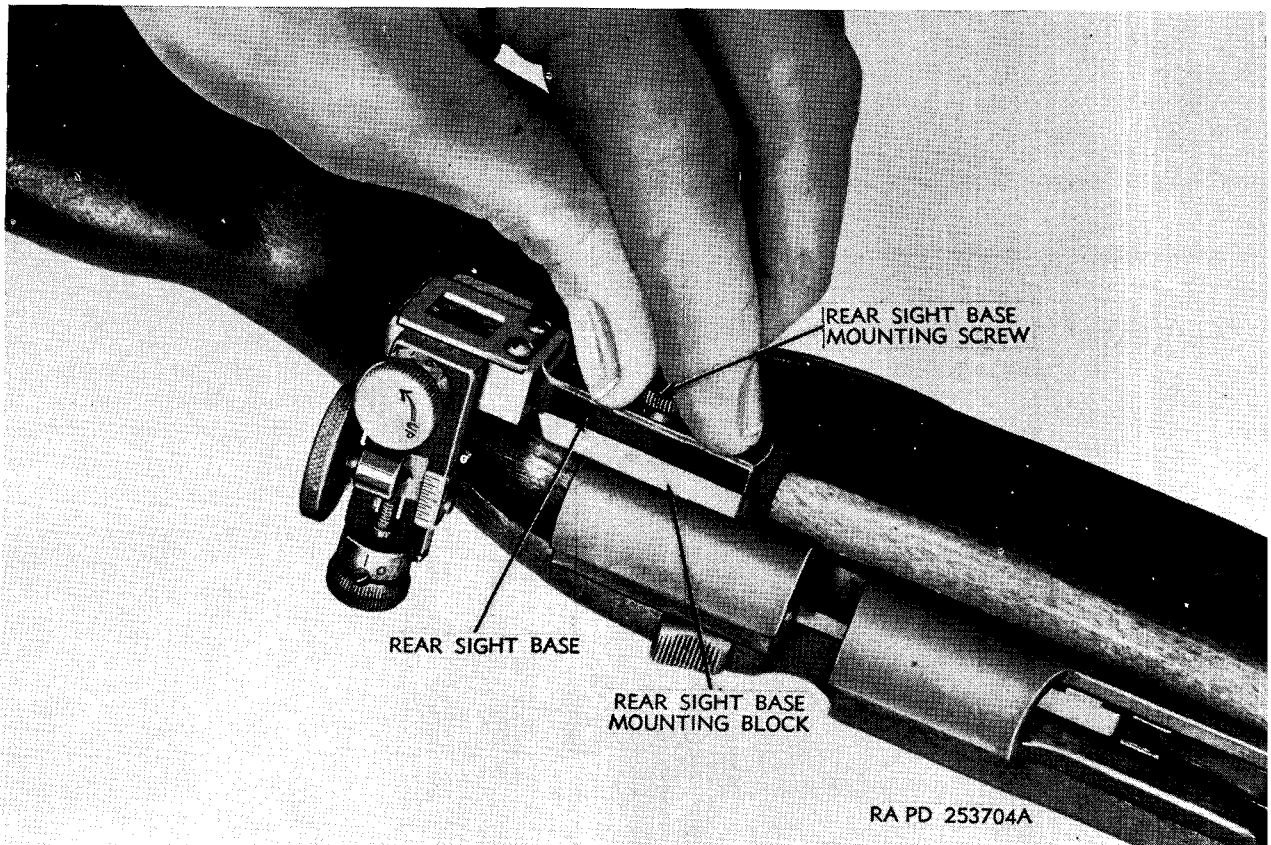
Removing or installing rear sight assembly (Remington rifle M513T).
